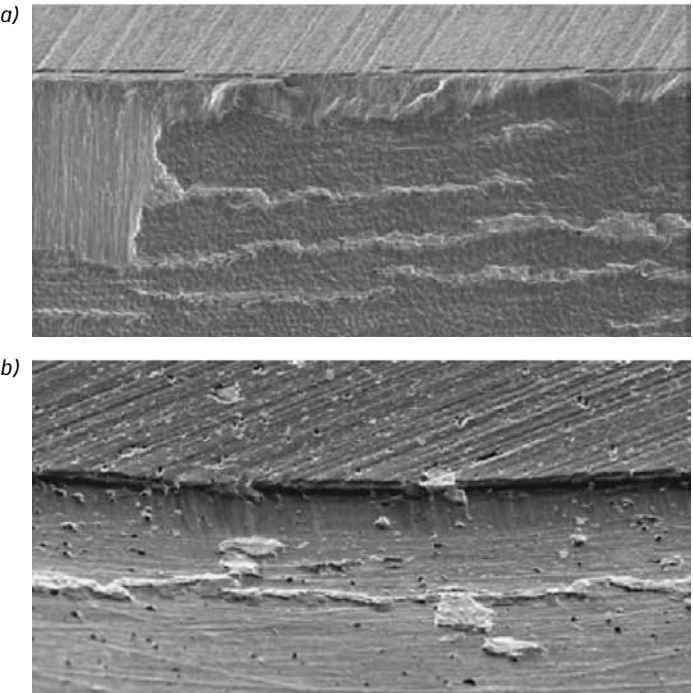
Appearance of a tool edge after 100 000 parts produced in Docol 1400 M. a) shows a CVD TiCN coating, and b) shows a multi layer TiAlN coating.
